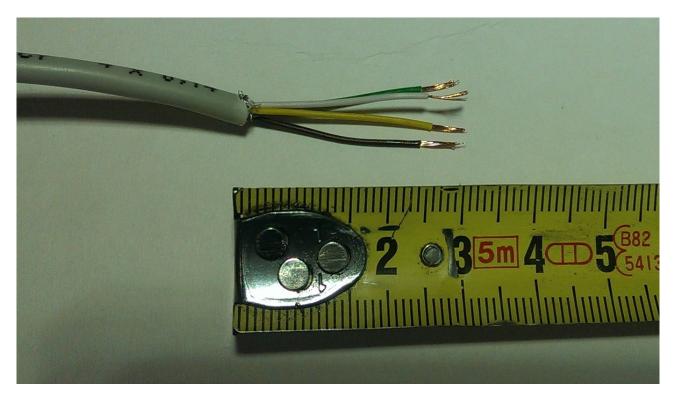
Remove insulation plastic layer of the cable and wires inside it.
